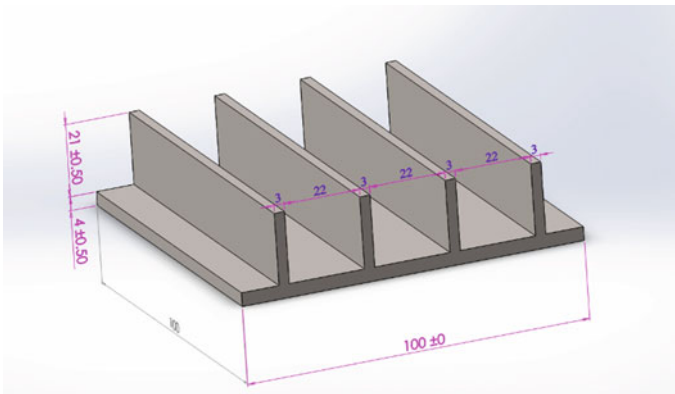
Geometry and dimension (mm) of the workpiece thin-walled Ti6Al4V
